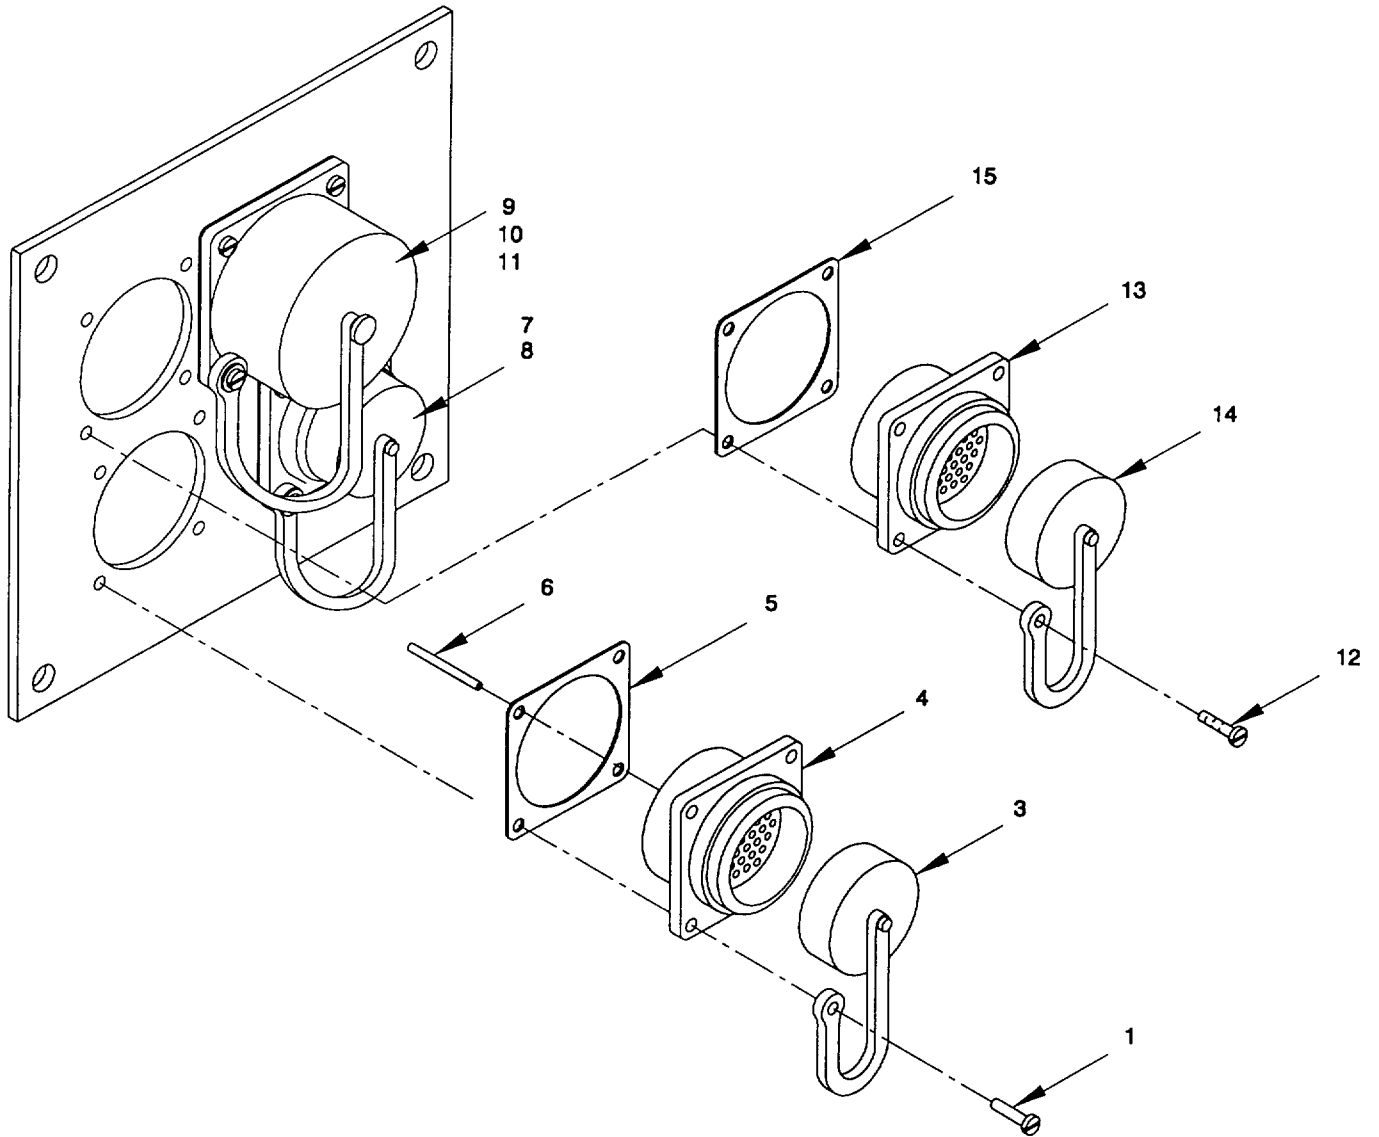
Typical Starboard Receptacle "A5"/Port Receptacle "A6" Assembly, Repair.
